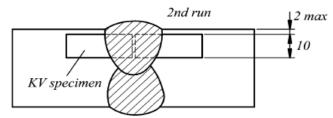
Butt weld test assembly during testing "wire - flux" combinations for two-run welding technique (test specimens are designated according to Table 4.4.1.4. All dimensions in mm.)
